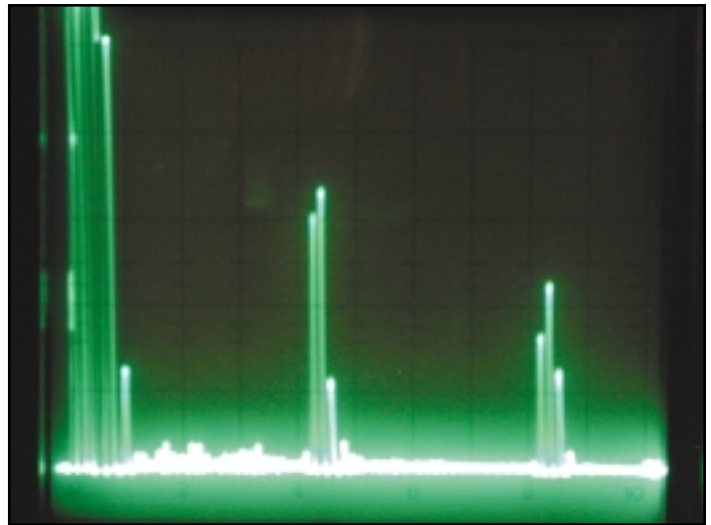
Ultrasonic Inspection oscilloscope display. The peaks indicated the depth of “reflectors”, such as defects, from the sample surface.
